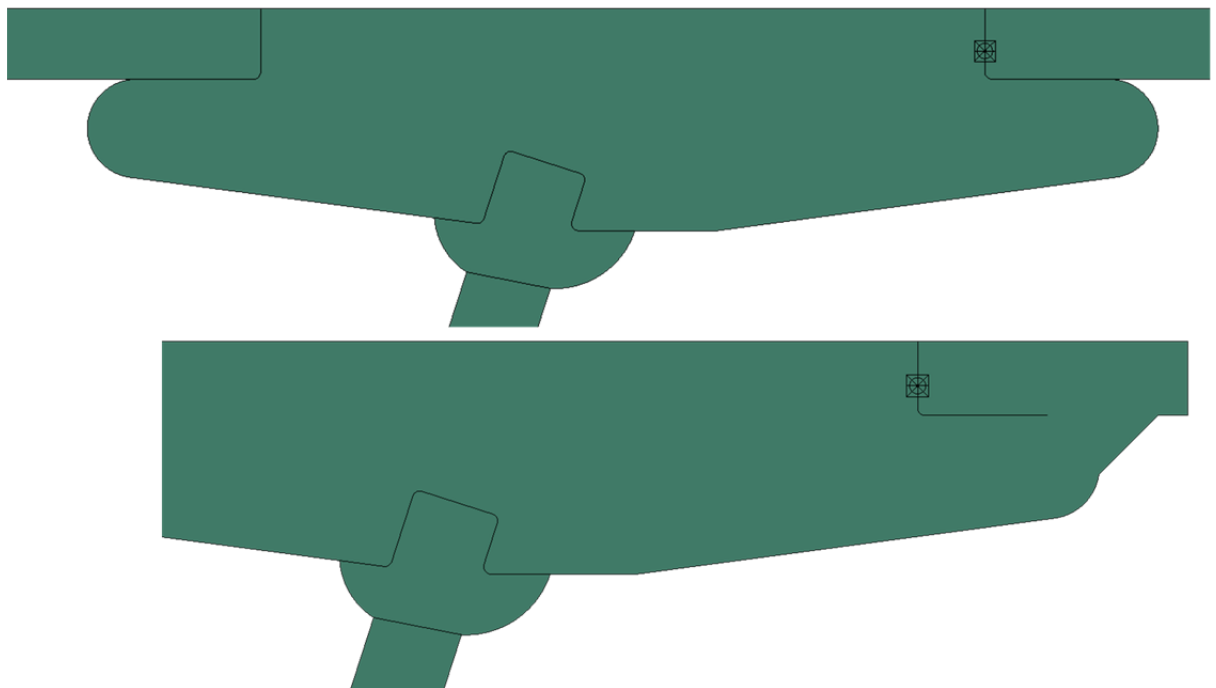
Illustration of the geometry for Case 10 (the flush-ground joint) with and without the additional internal fillet weld.
